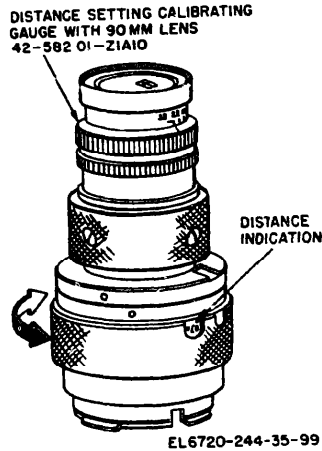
Distance setting calibrating gauge with 90-mm lens 42-582.01-Z1A10.
